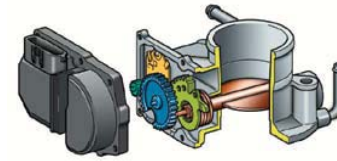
An electronic throttle has a small electric motor that moves the throttle plate through a set of reduction gears. (University of Toyota/Toyota Motor Sales USA)
